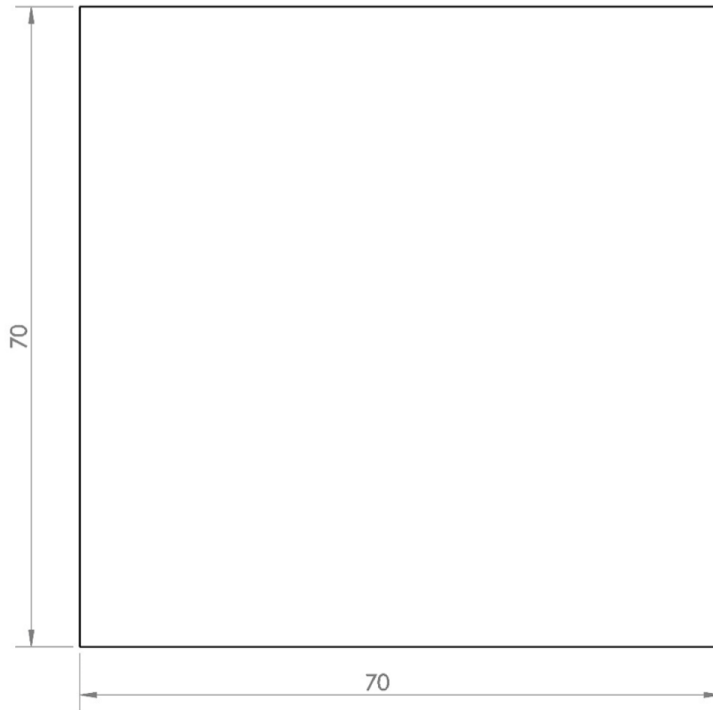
Front/Back view of lower mould (dimensions in millimetres).
